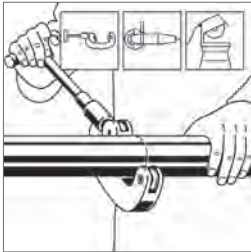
Cut the steel pipe properly and at a right angle using a pipe cutter, angle grinder or fine-toothed hacksaw. Do not use a flame cutter.
